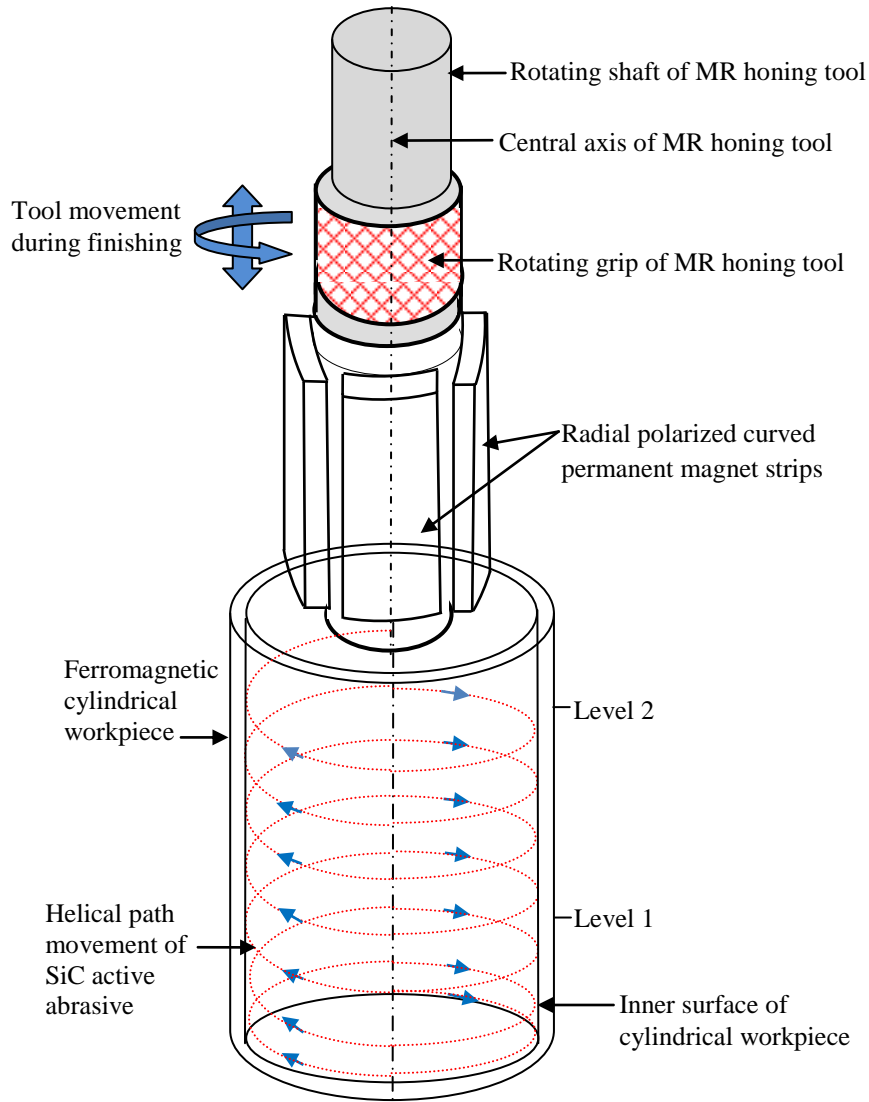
Schematic diagram of helical path movement of the active abrasive over the inner surface of the ferromagnetic cylindrical workpiece.
